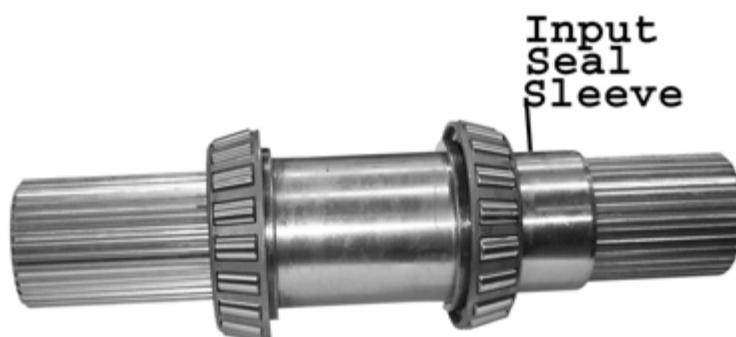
Input Shaft with Bearings and Seal Wear Sleeve
